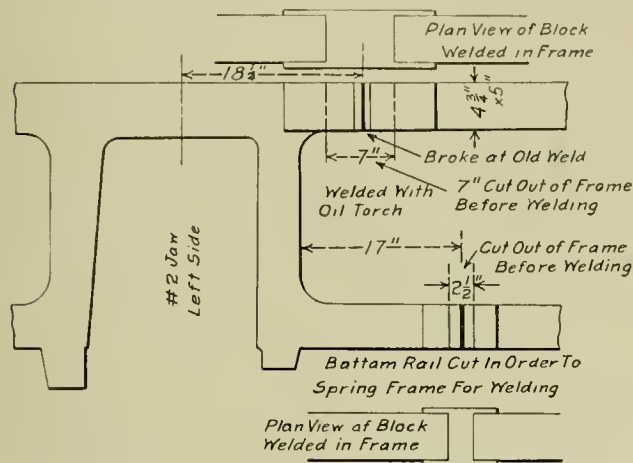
Location of Oil Weld on Frame of Passenger Locomotive
